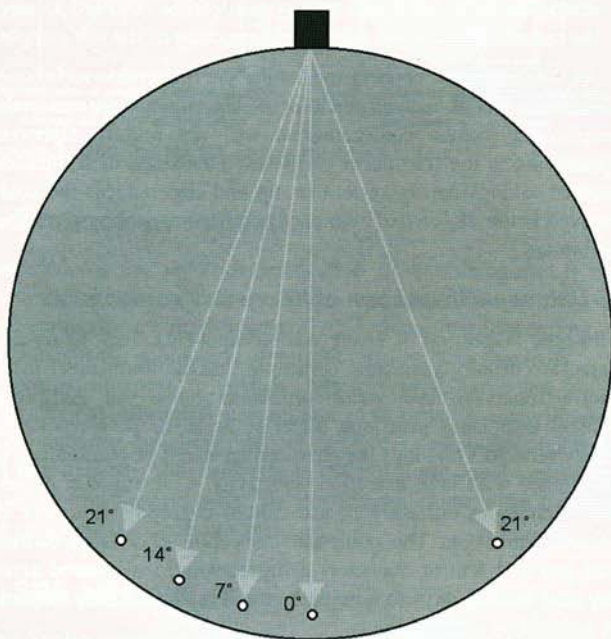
Test sample for ultrasonic inspection of turbine shafts
